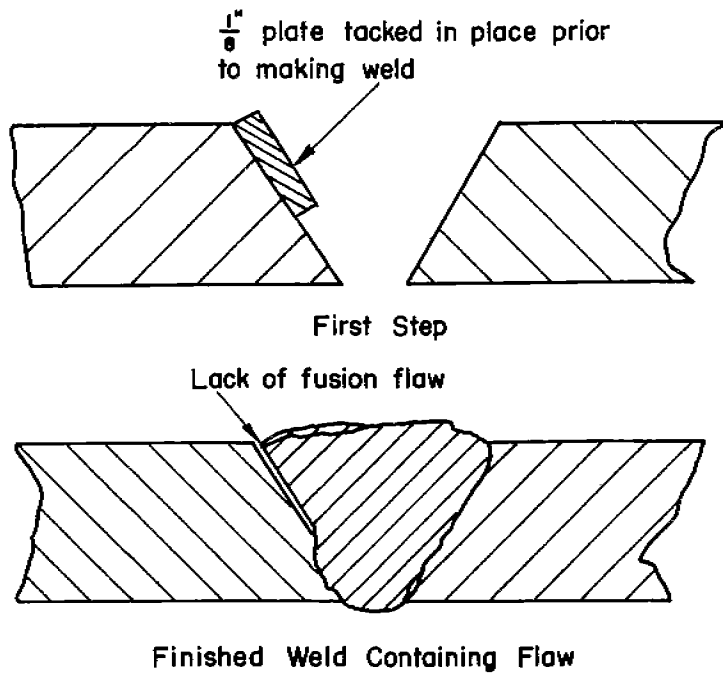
METHOD OF MAKING LACK-OF-FUSION FLAW
